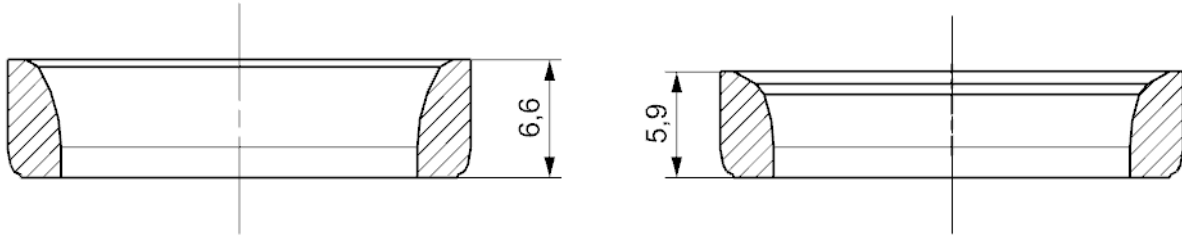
Valve seat cross section before (left) and after (right) machining
